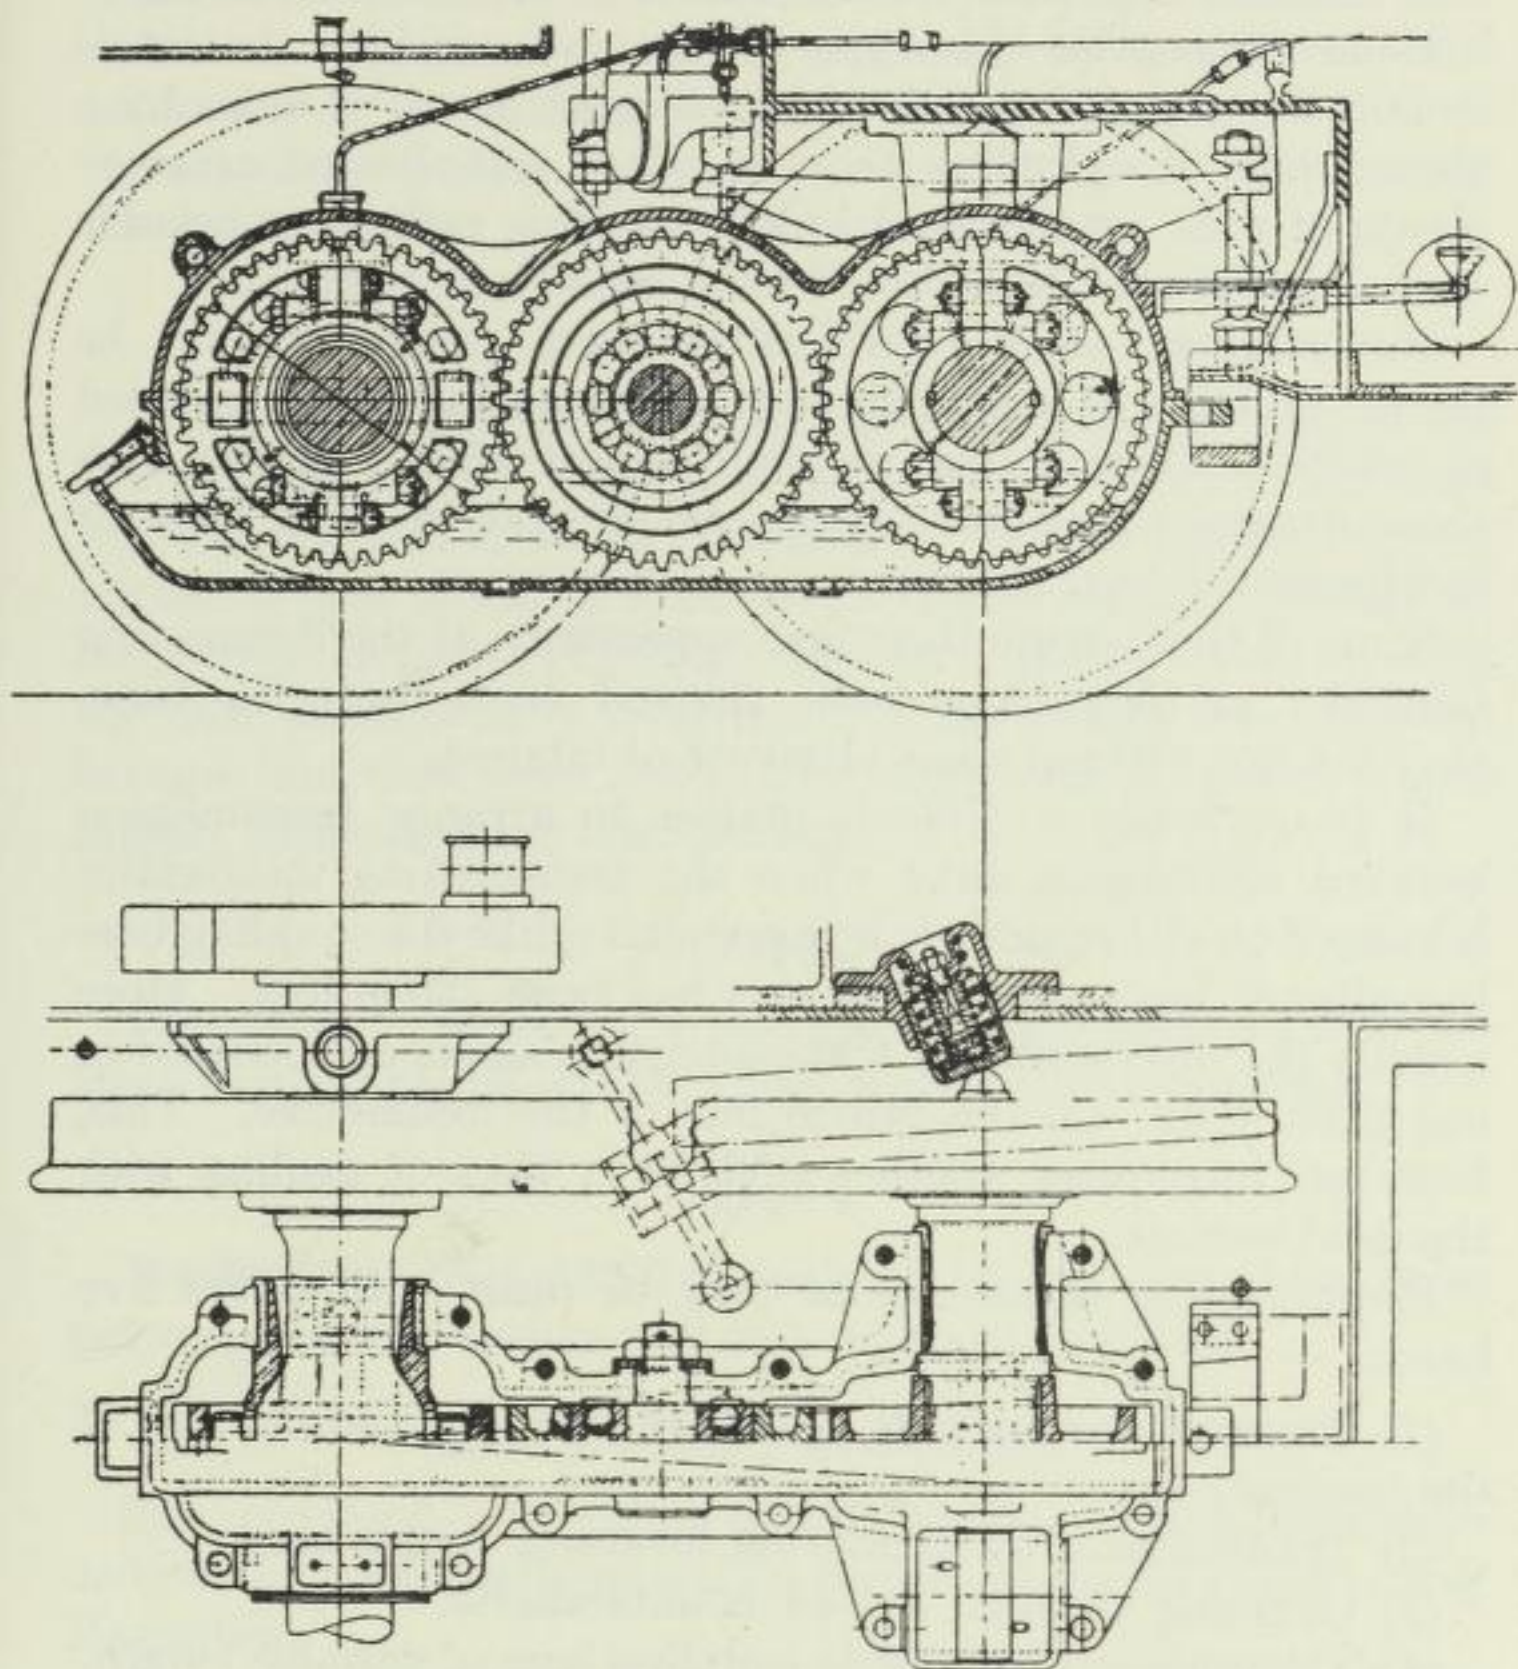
Henschel's Gear Coupling of Driving Axles.
